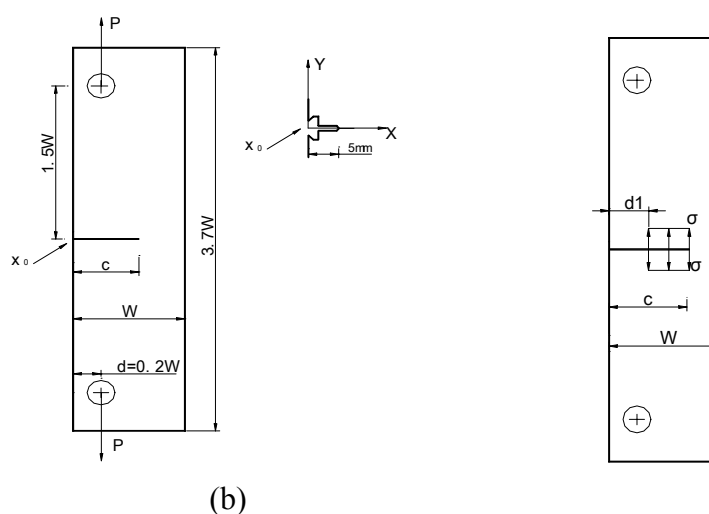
Extended compact tension specimen (a). Pin loading and notch details, (b) Uniform segment pressure acting on the crack surface
